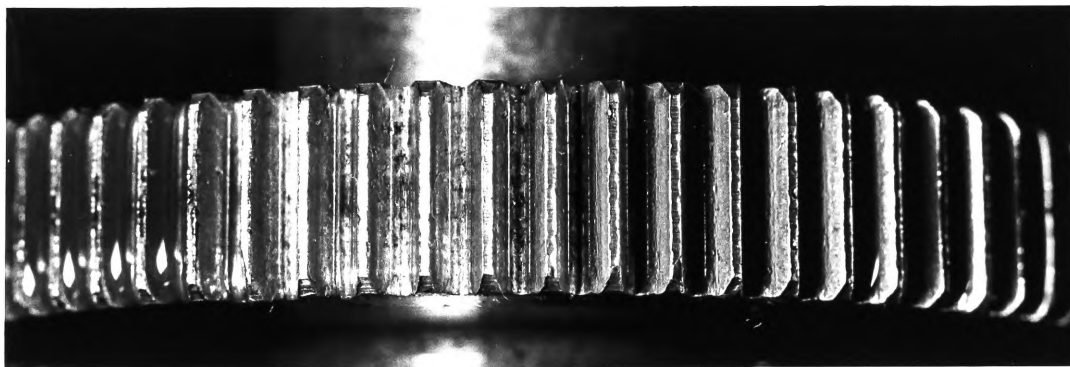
TEETH OF GEAR SET 2 PINION - 8573 HOURS
